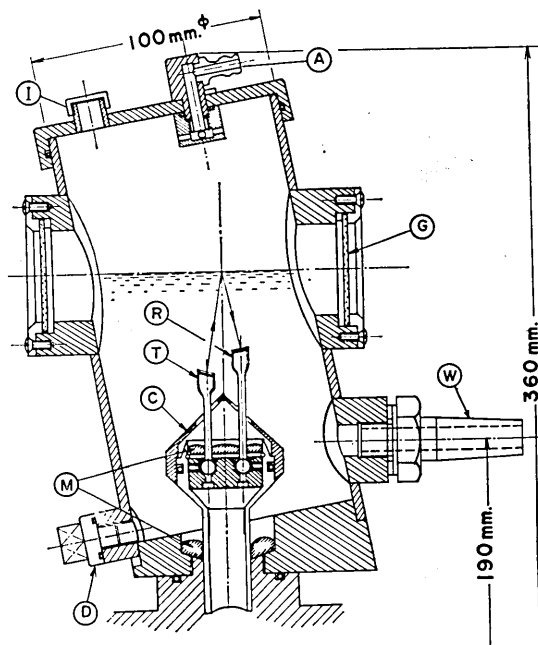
Cross-sectional view of a senser. (Hokushin-type)
